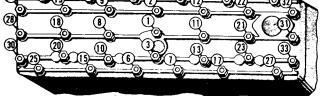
Cylinder Head Tightening Sequence — Six Cylinder
